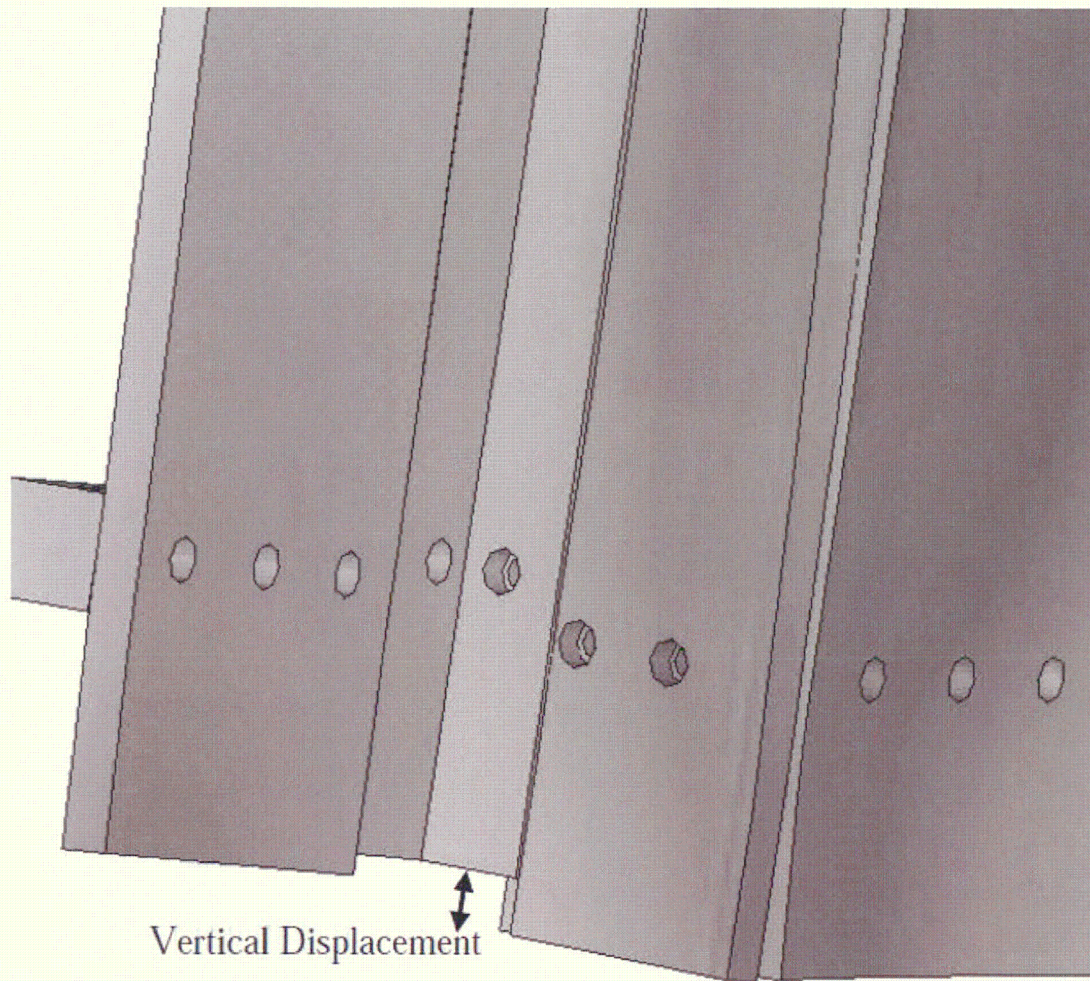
Bolting in a Typical Westinghouse Baffle-Former Structure
